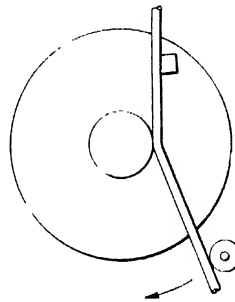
PRESS STRAIGHTENING ON A COMPRESSION BENDER
